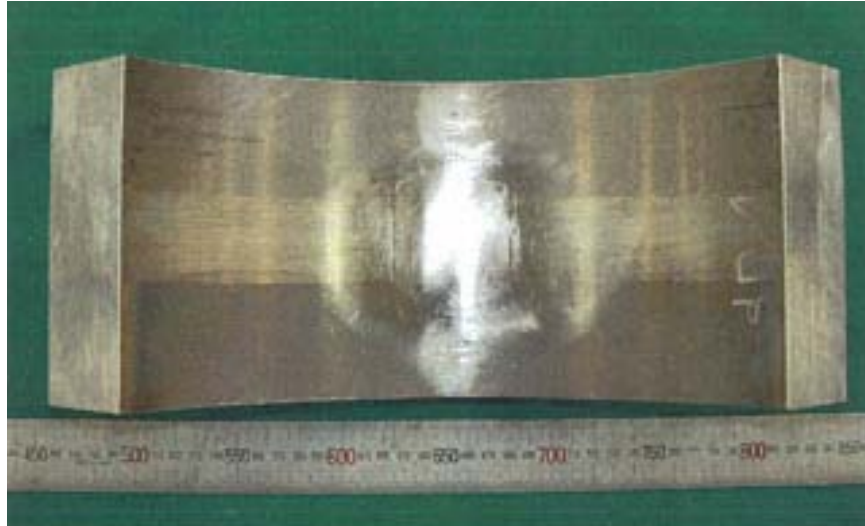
PINC Block 2.4 from JNES – PZR Surge Line to Safe-End Dissimilar Metal Weld
